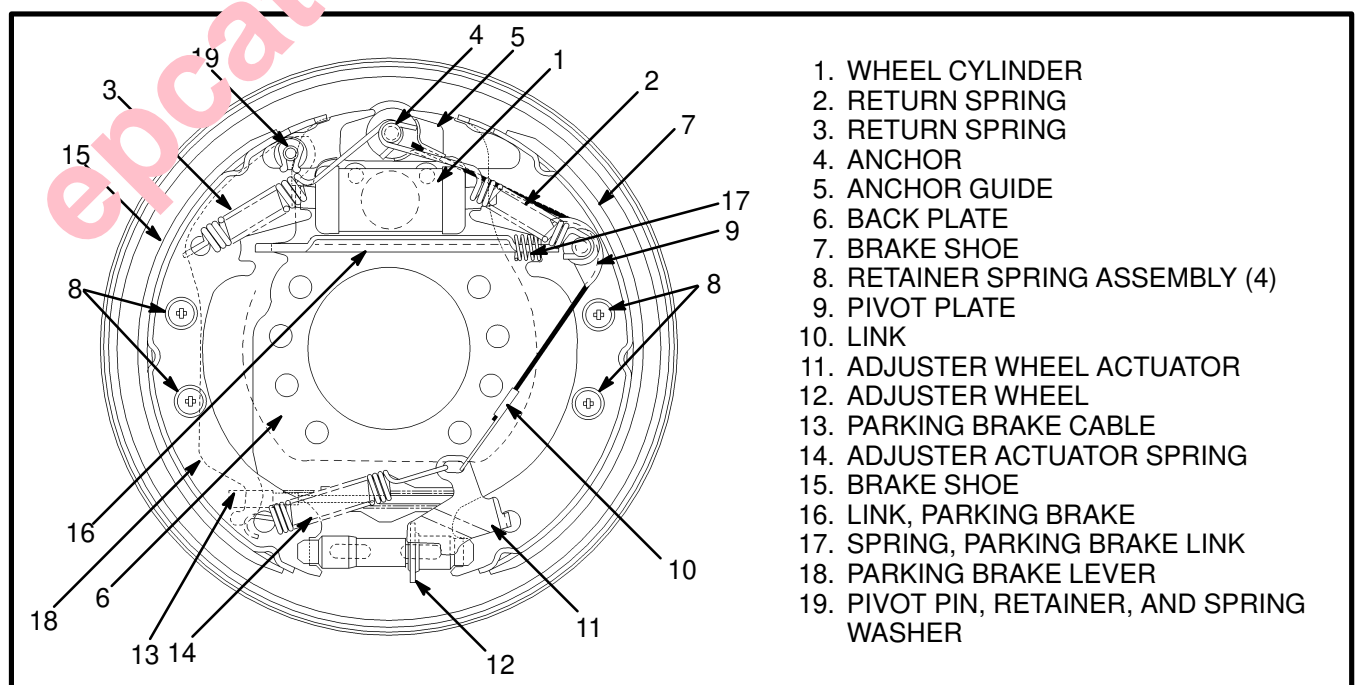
BRAKE ASSEMBLY (LEFT BRAKE ASSEMBLY SHOWN)
